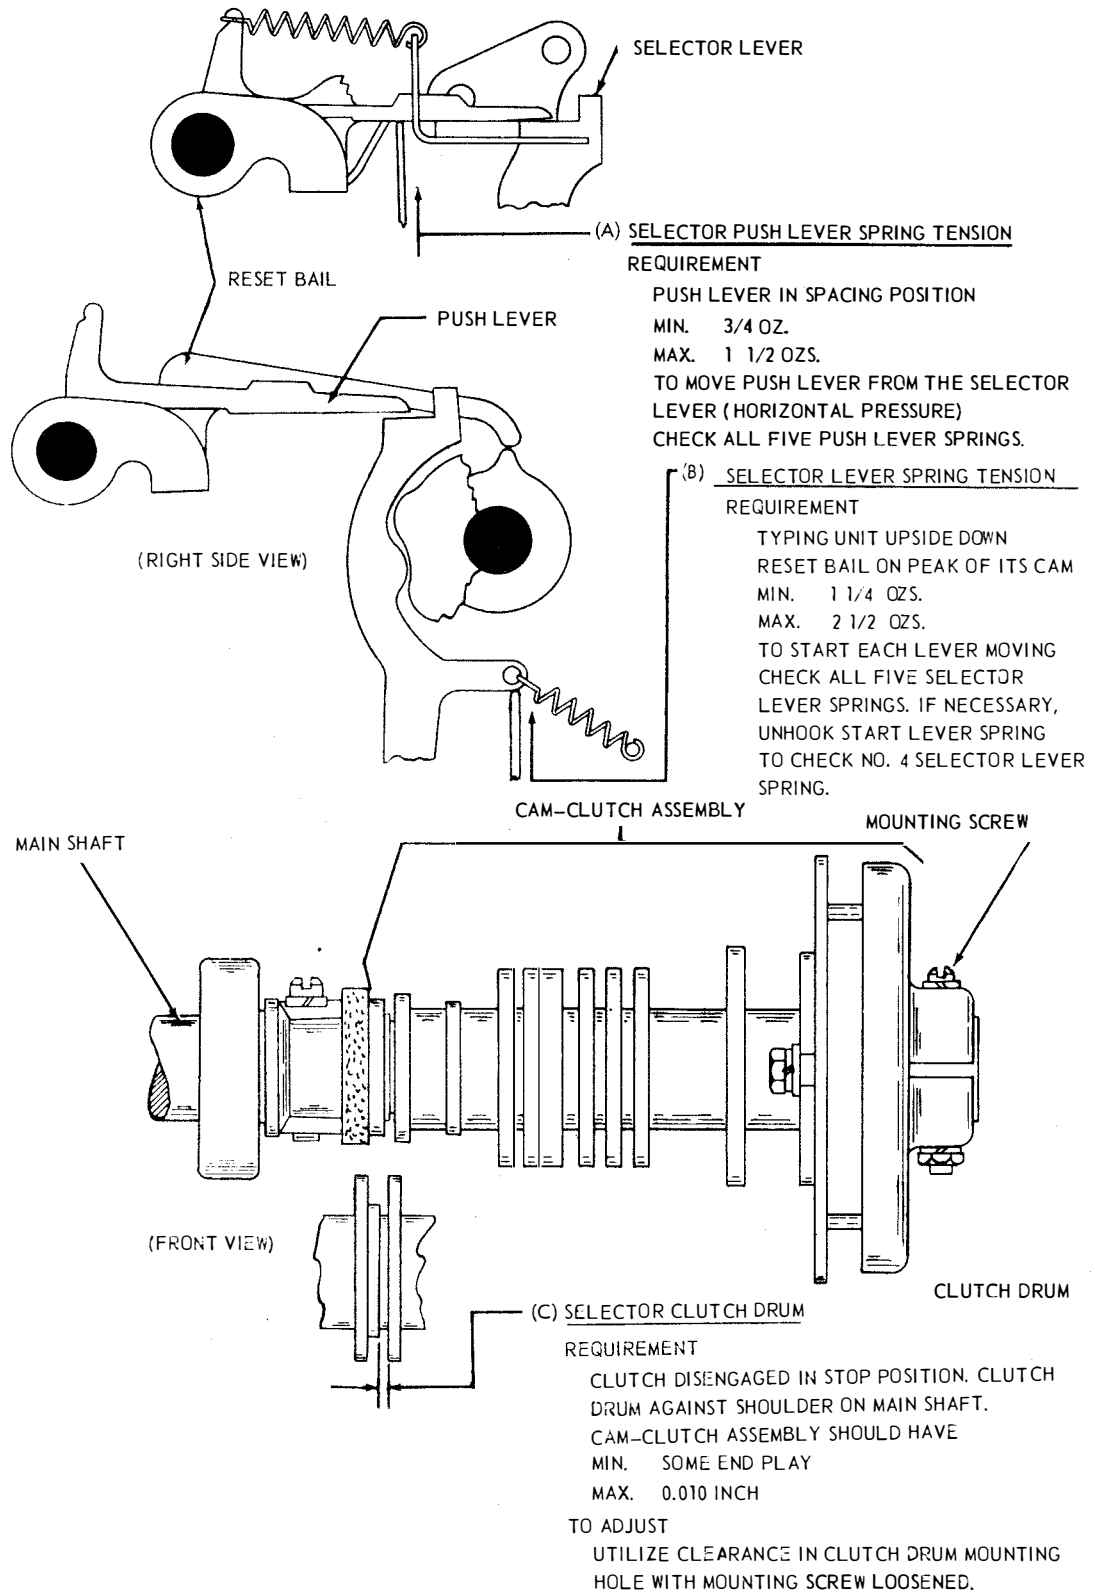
Automatic Typewriter, Selector Cam Clutch
